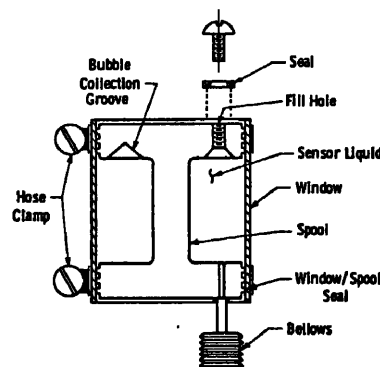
Cross-sectional view of cylindrical structure comprising sensor replica.
